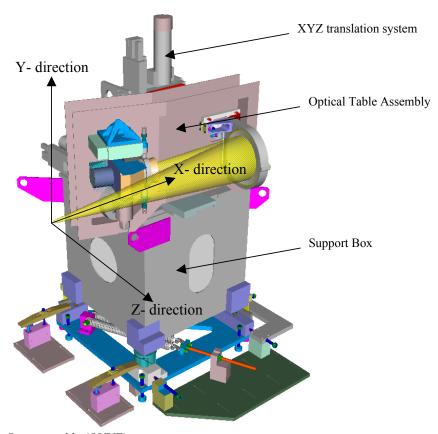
IASI OGSE Spot Scan assembly (OUVE)
